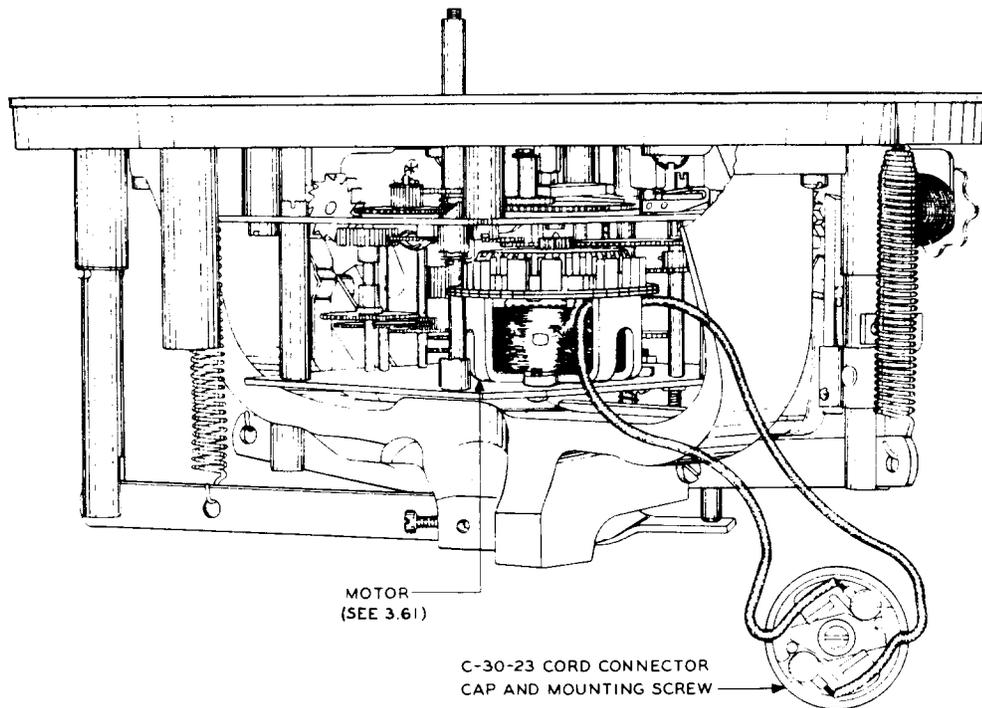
Motor Mechanism - Model 30 Calculagraph (Motor With Copper Bar Rotor)
